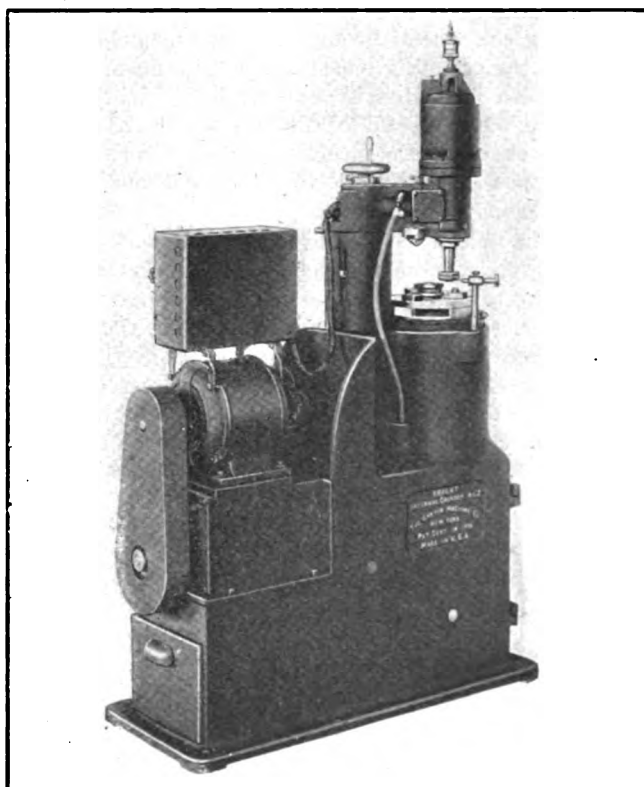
REAR VIEW OF BRIGHT MACHINE
